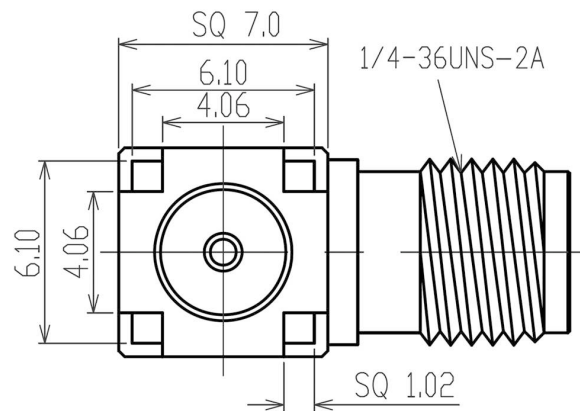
FIGURE A: RECOMMEND PCB MOUNT LAYOUT
